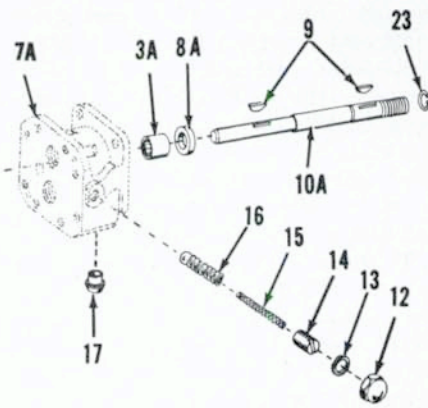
After diesel tractor Serial No. D17-38963, a Barnes pump similar to that shown in Fig. 19, except for drive end parts shown above, is used alternately with a Webster pump.
